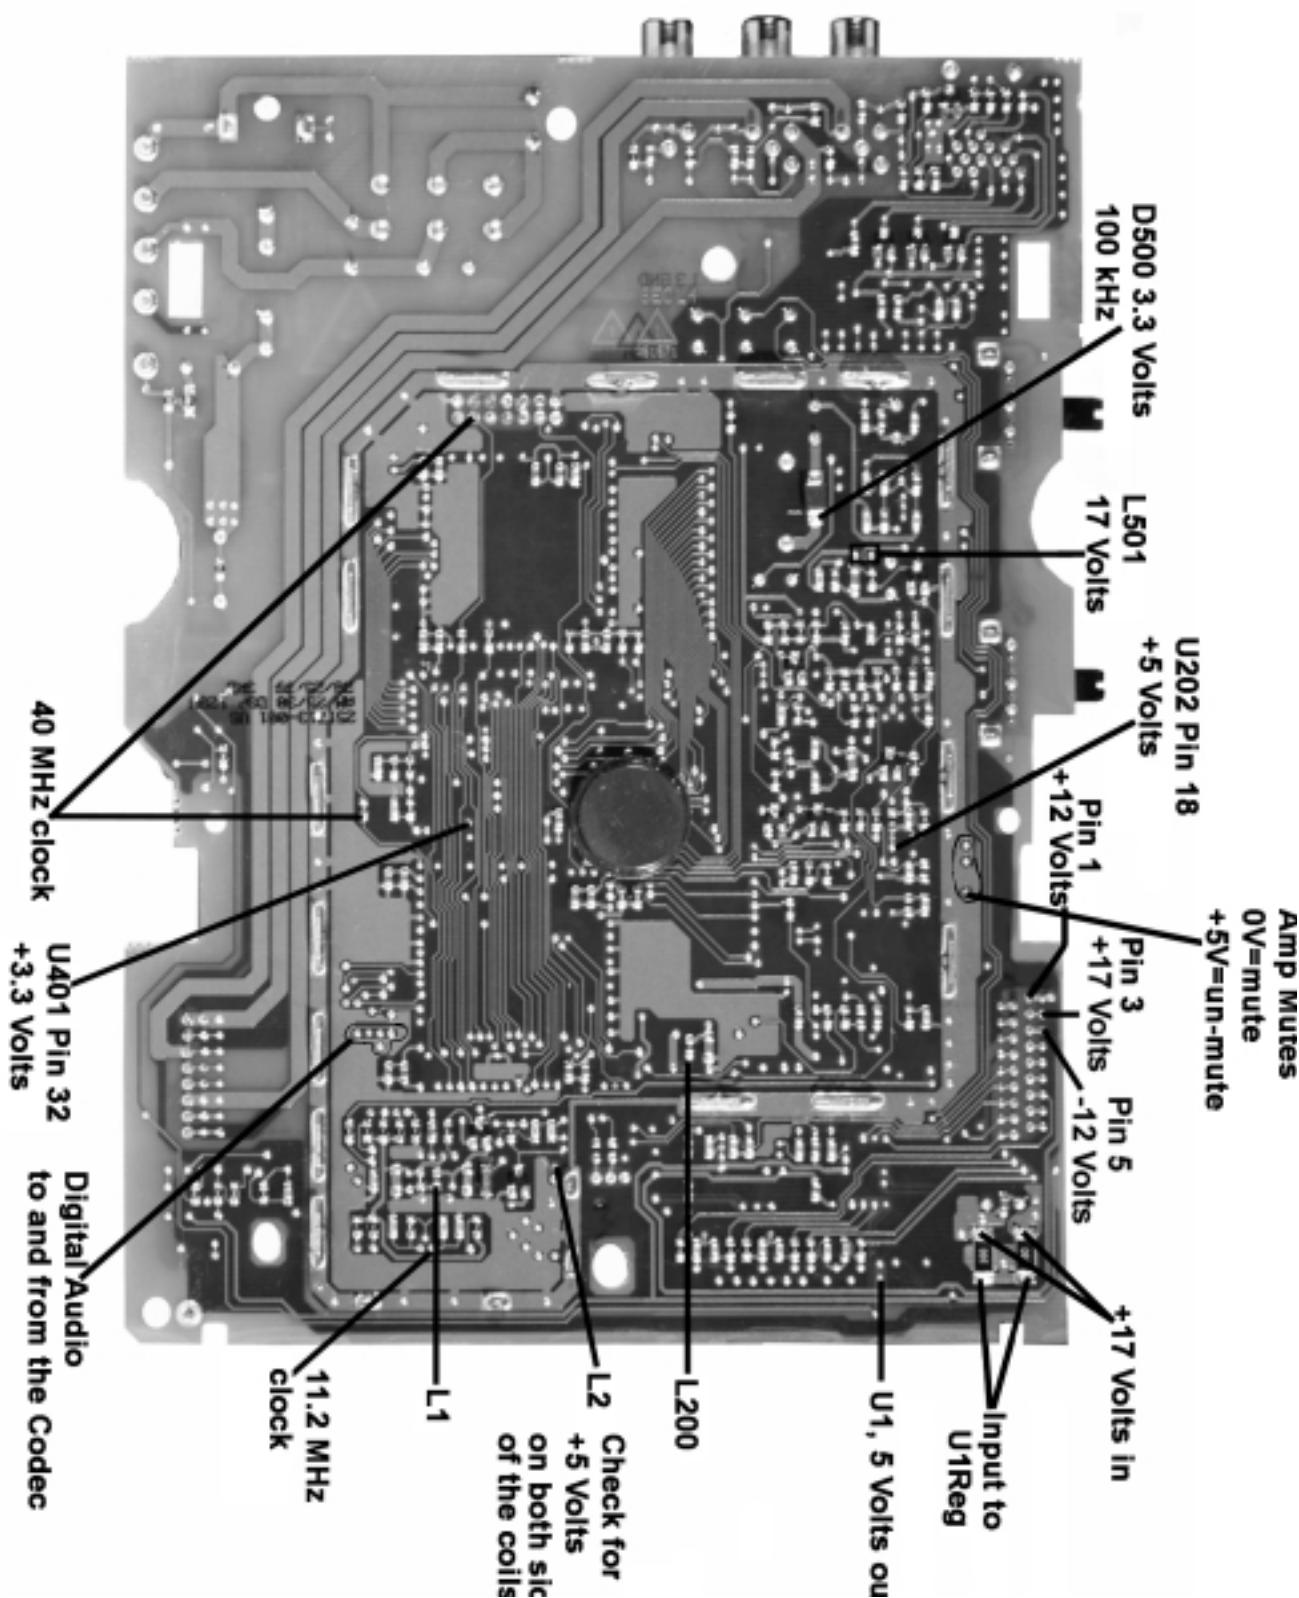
DSP PCB Test Point Locations Layout Diagram, Solder Side
